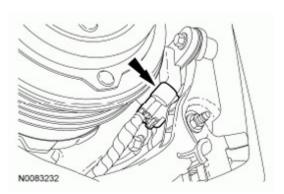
Locating A/C Compressor Bolts Courtesy of FORD MOTOR CO.
